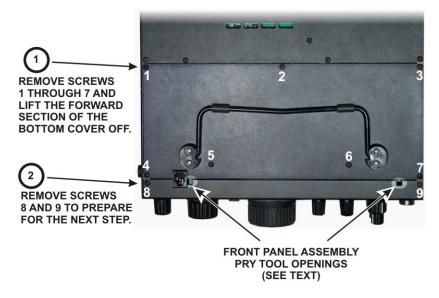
Removing Bottom Cover and Front Panel Assembly Screws.
